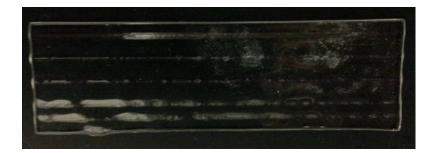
Improvement step 3 using SFGTM mold in a kiln
